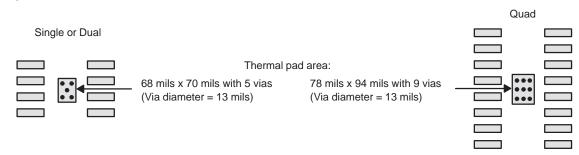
PowerPAD PCB Etch and Via Pattern
